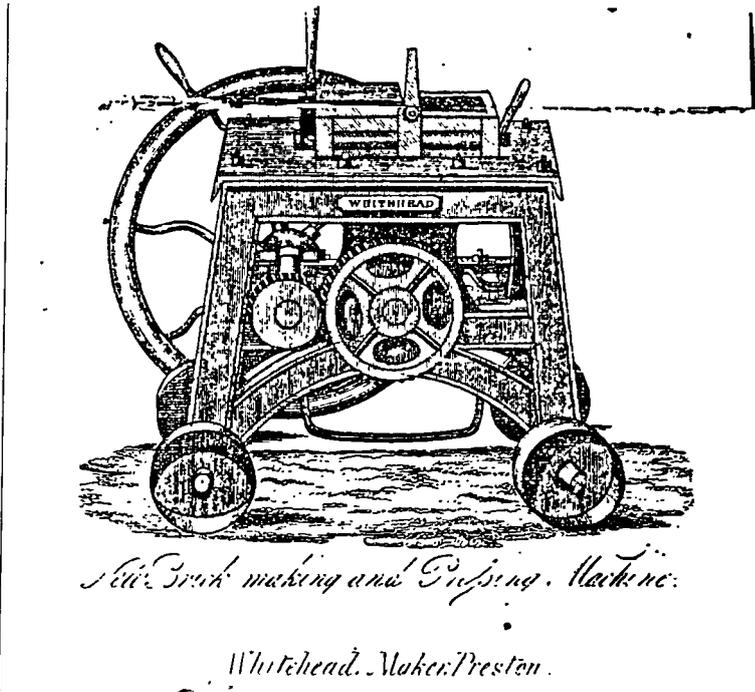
Brickmaking and pressing machine, John Whitehead, manufacturer.
